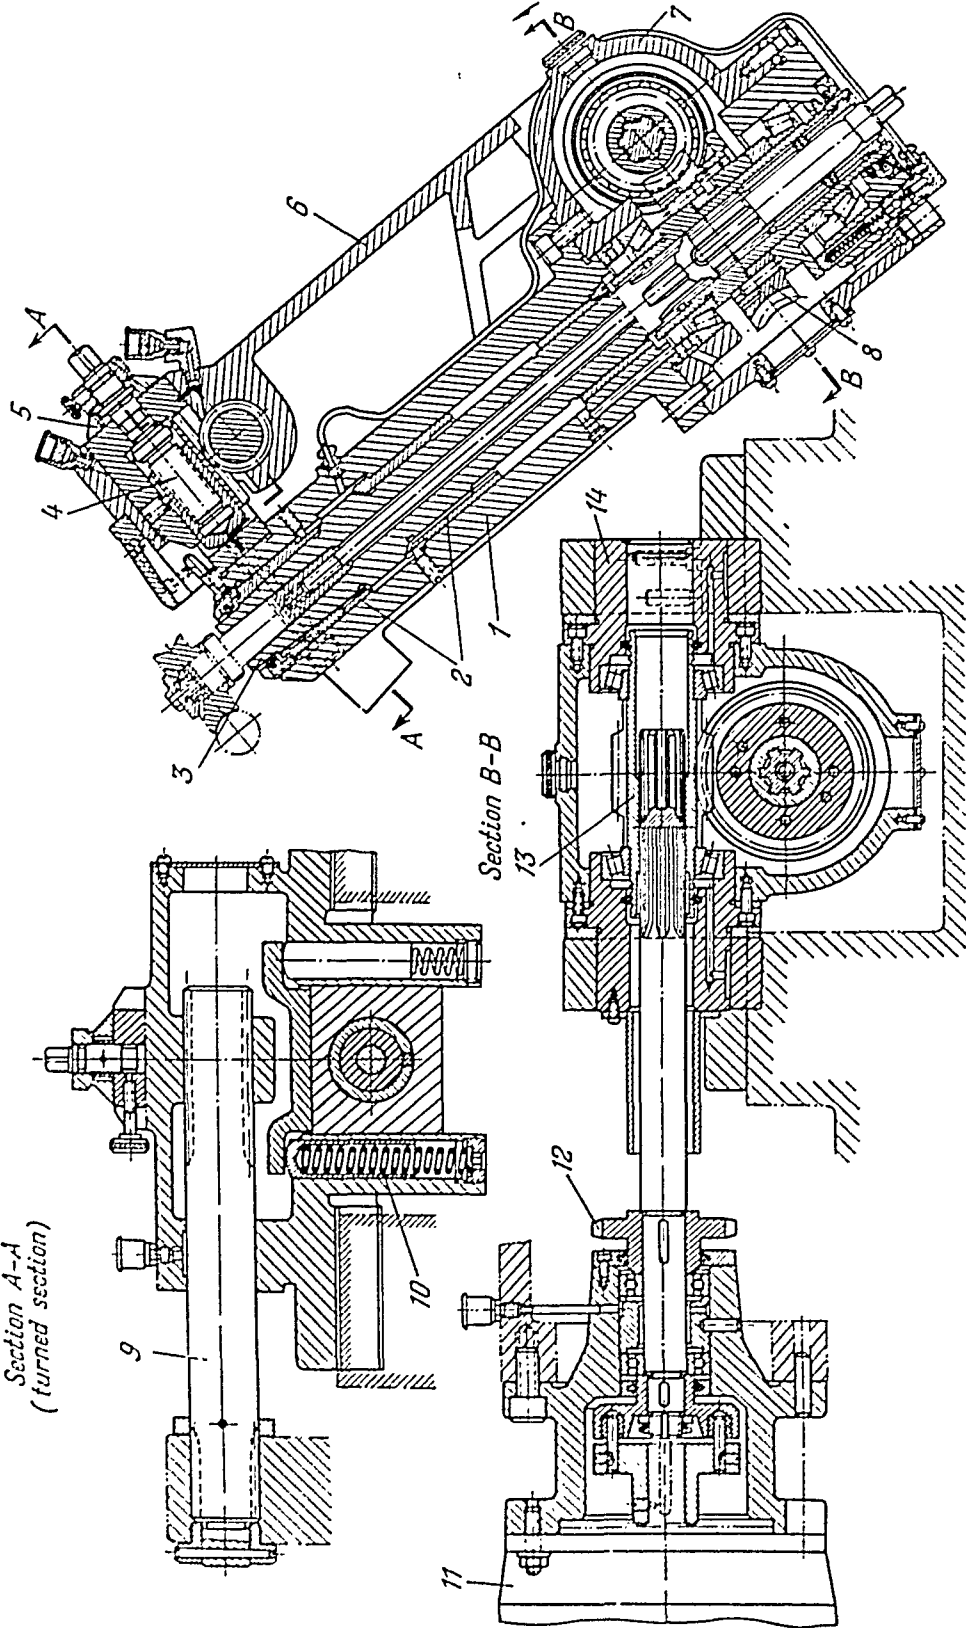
Clearance milling head of the semiautomatic milling machine:
